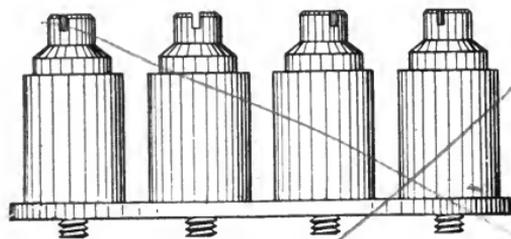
Tool-Maker's Buttons with Screws and Washers for Jig Work
